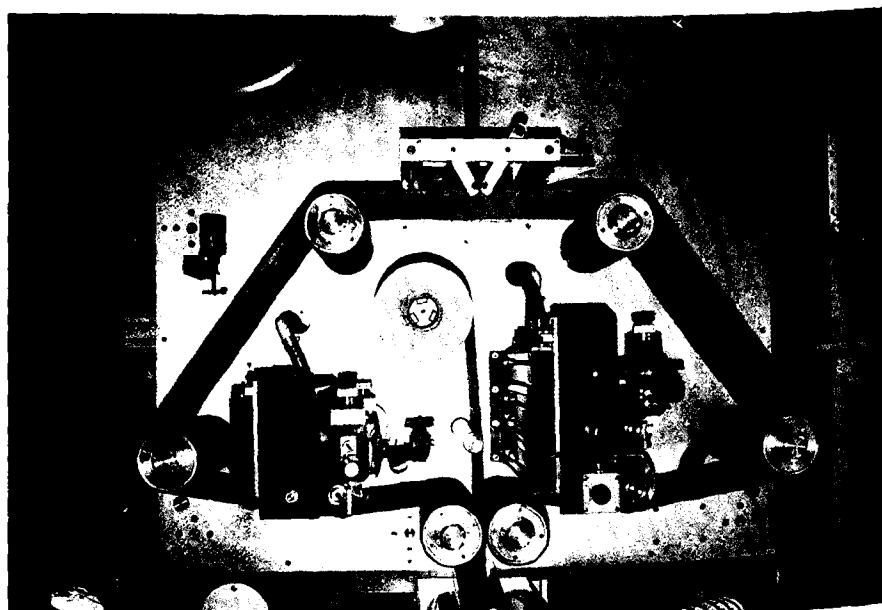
Splitting the paper and inserting the core material in the paper splitting machine.
